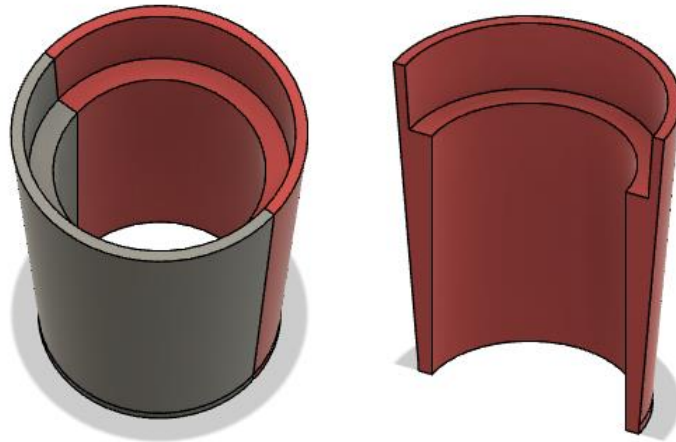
Outer components of the nozzle mould divided in two pieces for easier demoulding.
